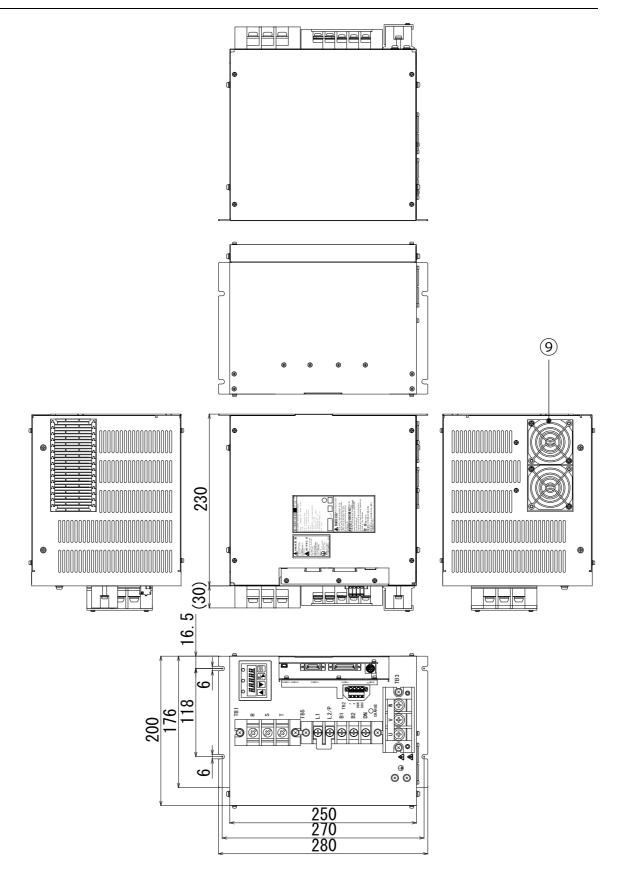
Outline drawing of the main unit of the device with 15 kW (Type 6)
